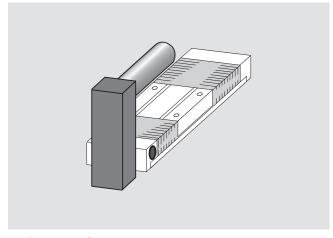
Screw drive with lateral motor mount at left hand side (Mounting condition 05)
